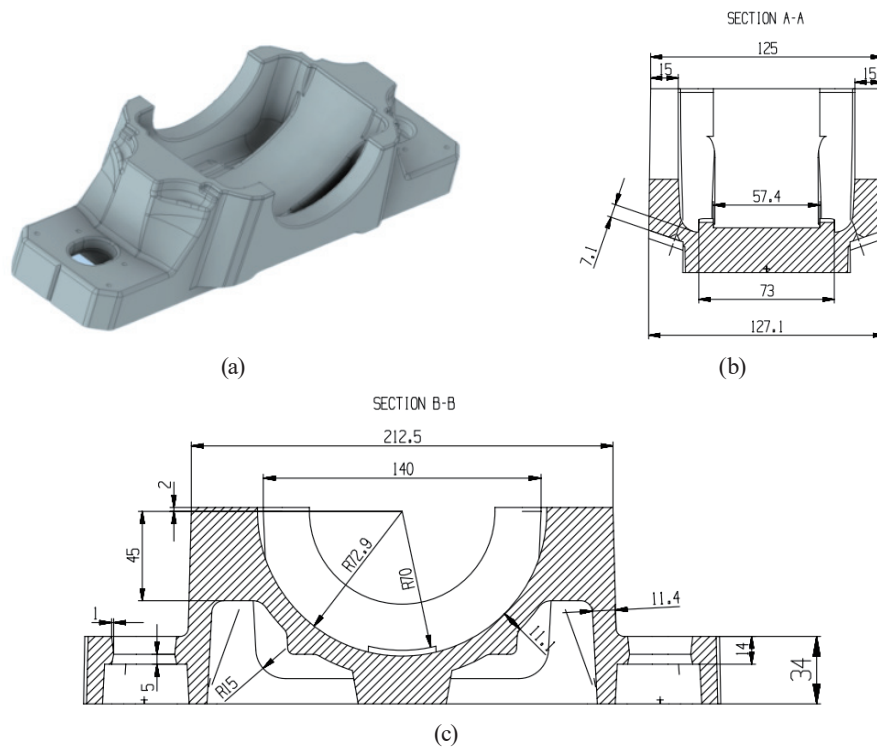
(Color online) Schematic diagram of bearing seat. (a) Schematic diagram and (b), (c) CAD dimensions.
